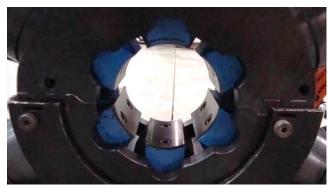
Dies (Blue) for 3" Fitting in Crimper
